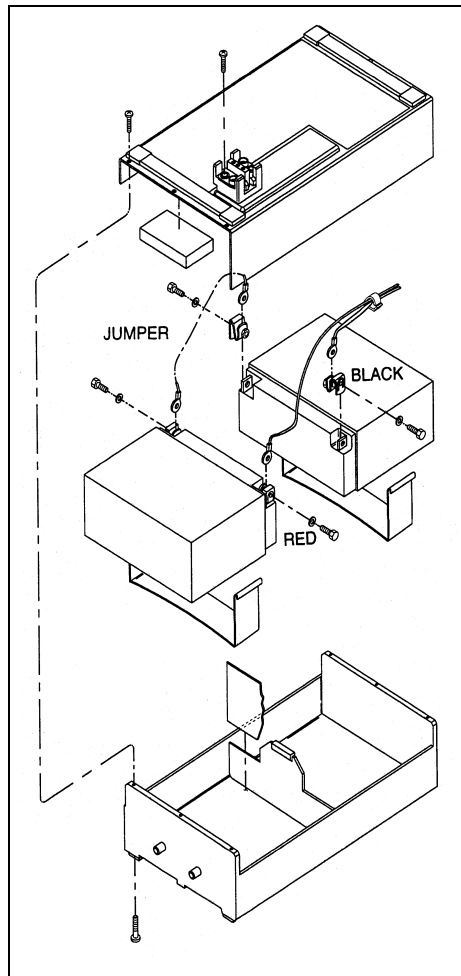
Battery Assembly, Exploded Isometric View
